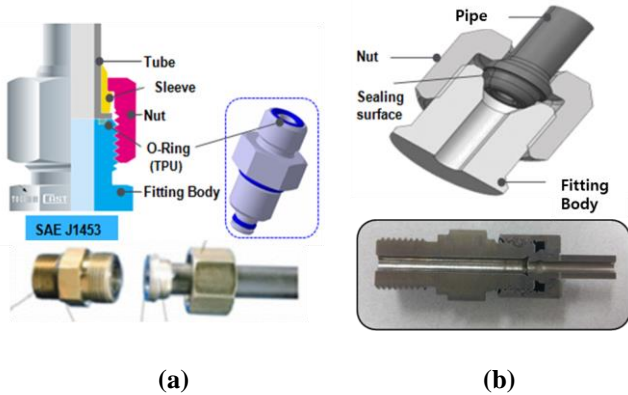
Typical sealing of pipes: (a) rubber-based O-ring type; (b) metal sealing
